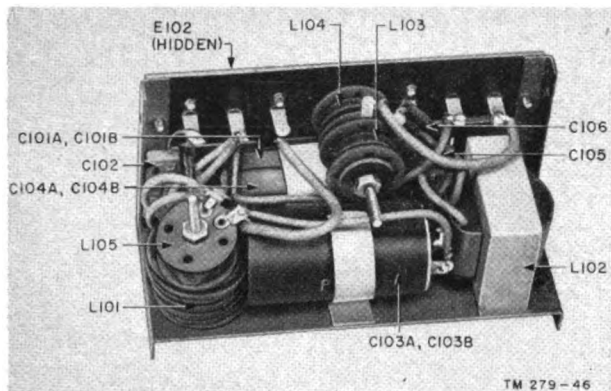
Dynamotor power supply, bottom view of filter, serial numbers 1 to 74 inclusive.
